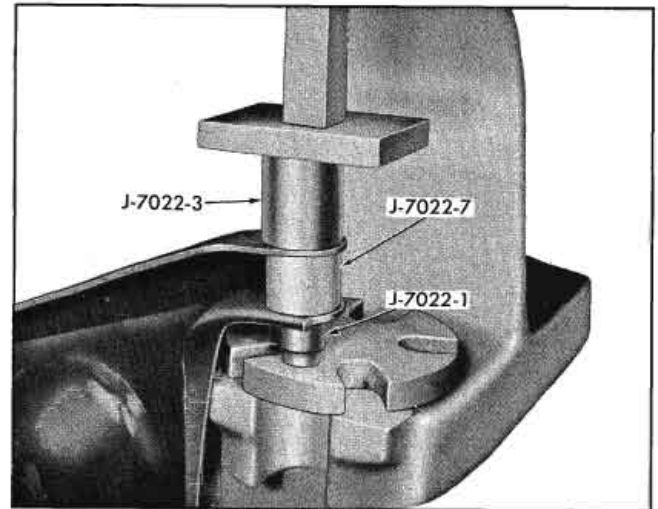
Removing Rear Bushing from Front Lower Control Arm
